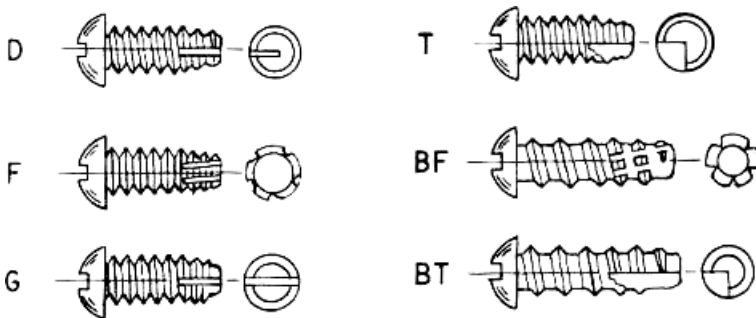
Thread-cutting screws most often used in thermosetting plastic materials.
